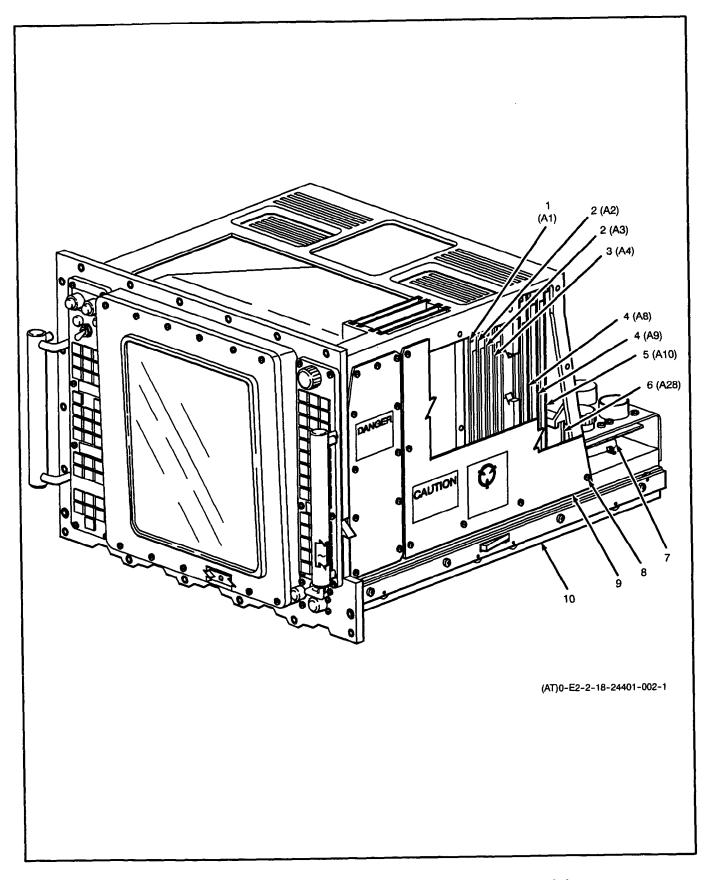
Replacement of Circuit Card Assemblies (Sheet 1 of 2)
